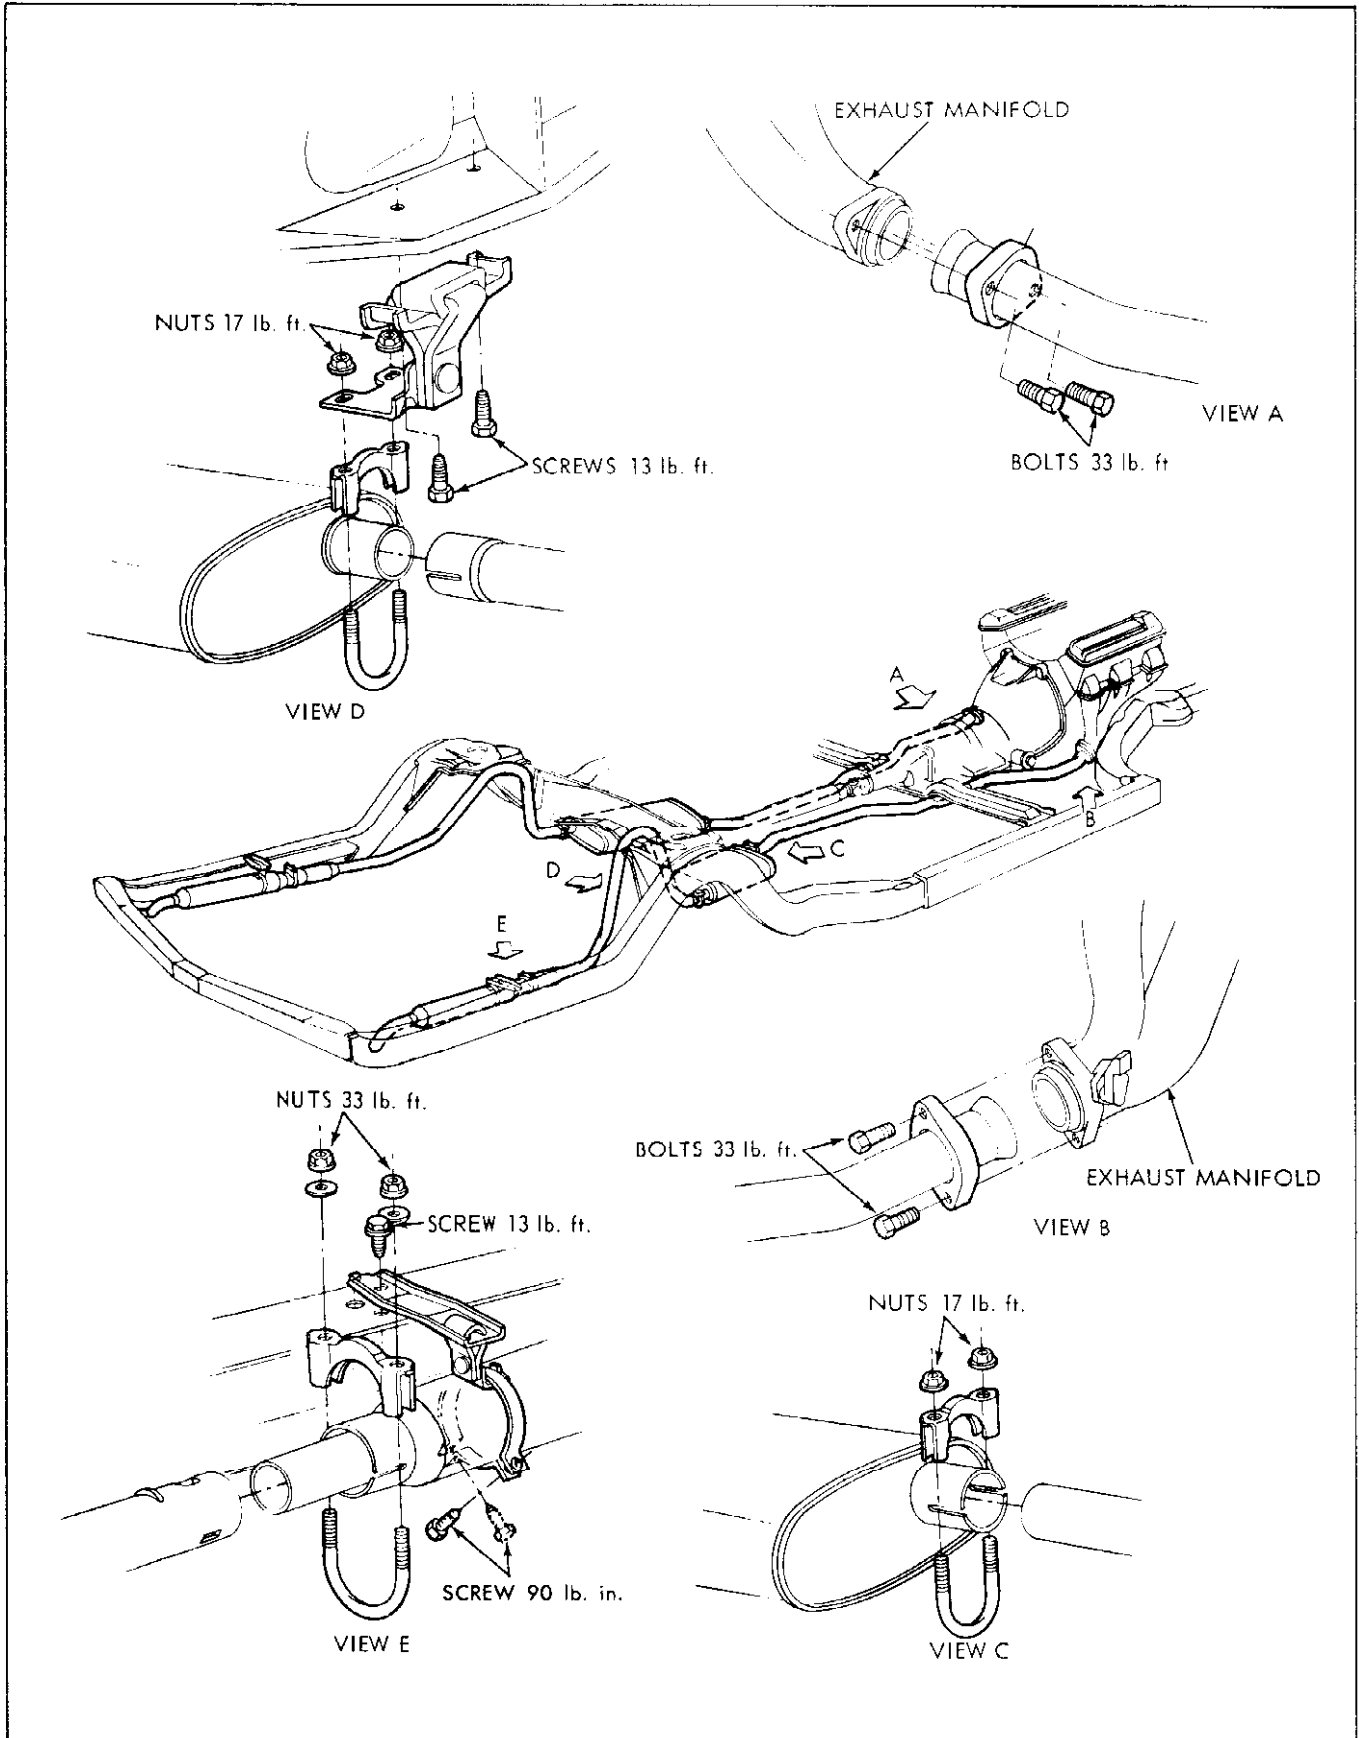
Pontiac Dual Exhaust System - 428 - "376" Engine
